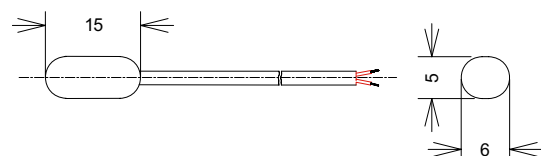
Dimensions of the control temperature sensor in plastic casing
